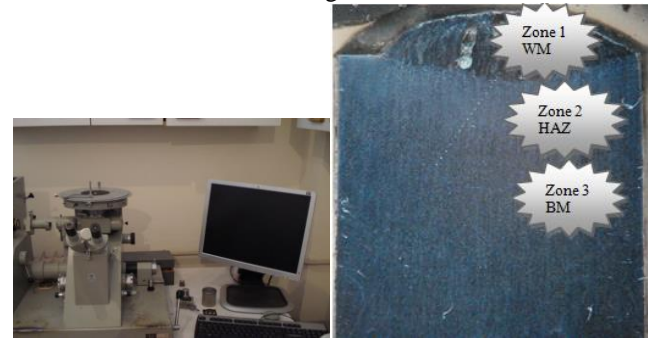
Metallographic Microscope NEOFOT-2 and macro-section of a sample from DDD11 steel welded with E DUR 600; WM-Weld Metal; HAZ-Heat Affected Zone; BM-Base Metal
